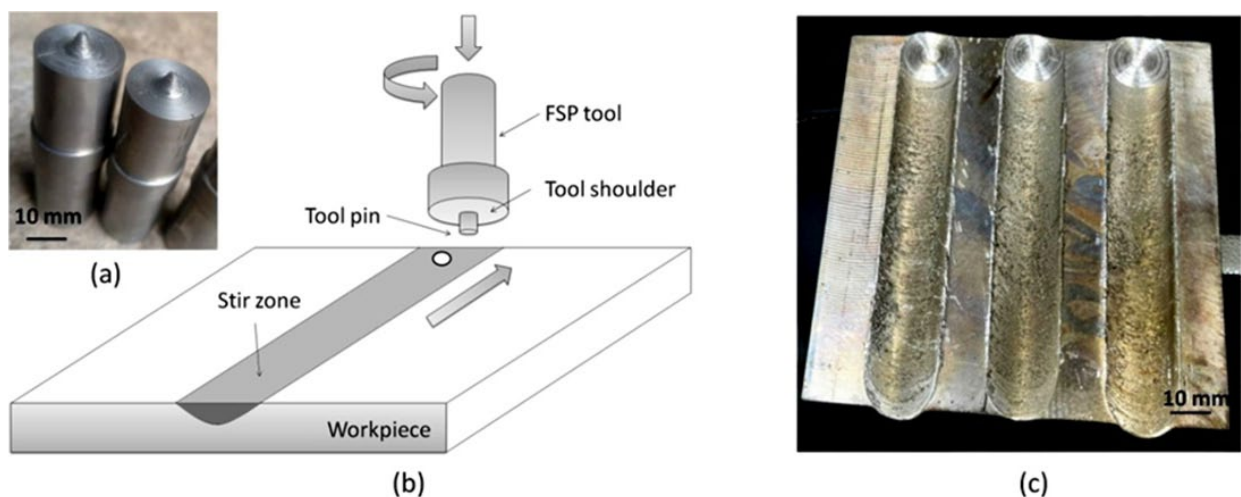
(a) Schematic representation of FSP process and (b) photograph of FSPed alloy sheet
